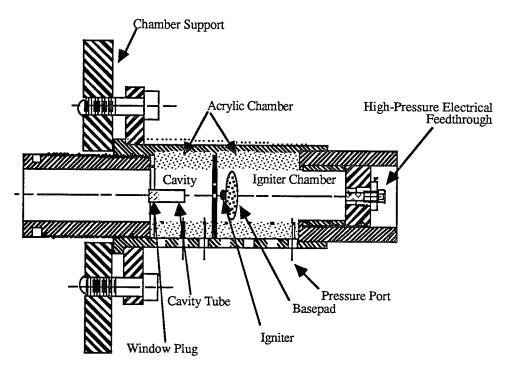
Cross-sectional view of flamespread simulator with cavity and igniter chambers.
